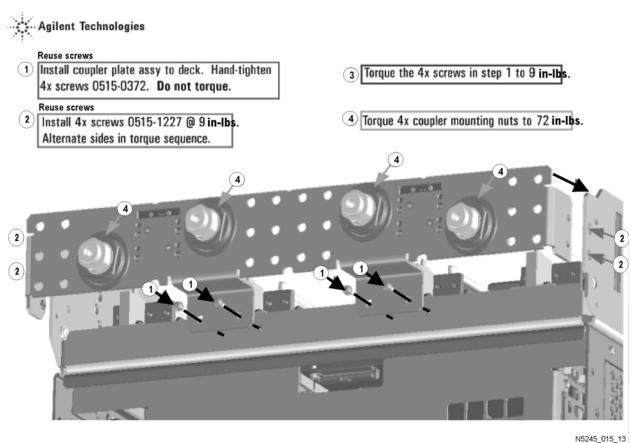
LED Board Assemblies and Test Port Coupler Assemblies Installation
